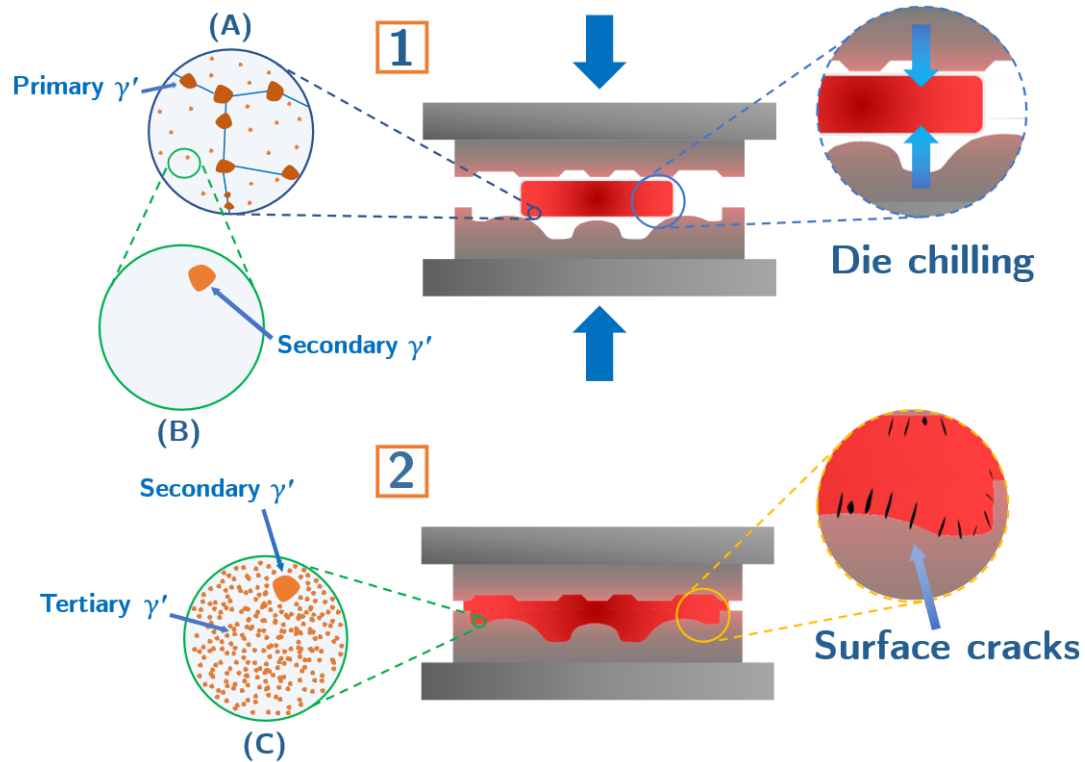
Proposed mechanism to explain hardening and increased surface cracking at higher forging temperatures in hot die forging. High forging temperatures induce great dissolution of relatively coarse γ'_s (A, B). Upon surface cooling, γ' reprecipitates as very fine, highly reinforcing γ'_t (C). These γ'_t substantially strengthen the alloy and lead to surface cracking.
